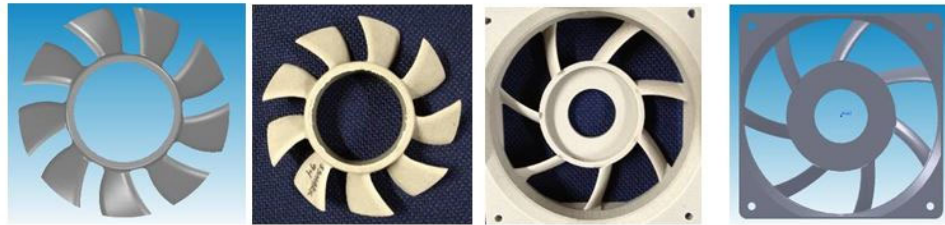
PAX V1 Fan Blade & Frame in CAD & Prototype
